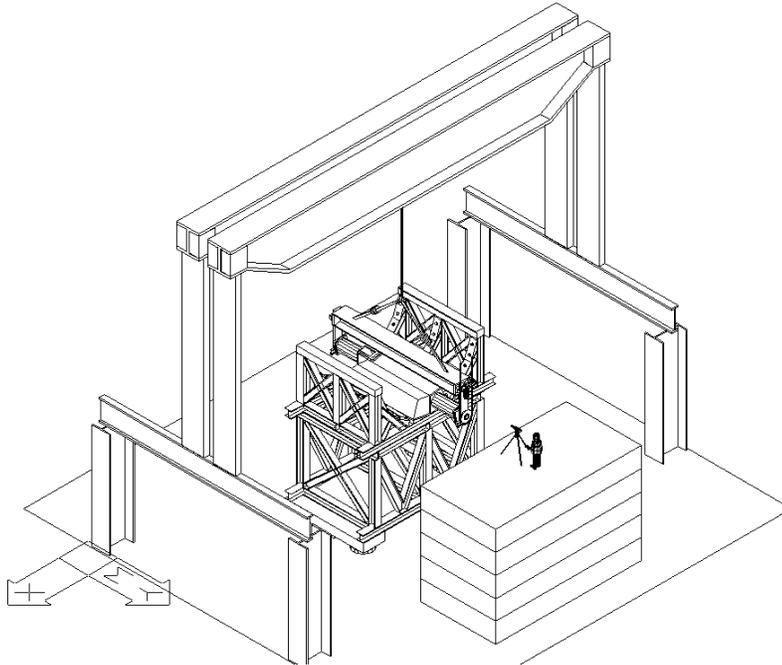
CMS HCAL barrel assembly / installation step 3.
